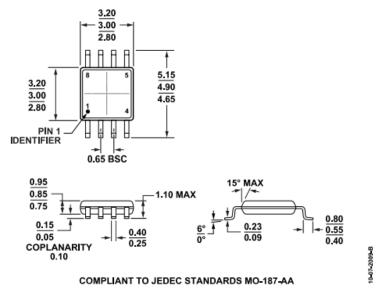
8-Lead Mini Small Outline Package [MSOP] Narrow Body (RM-8) Dimensions Shown in millimeters and (inches)
